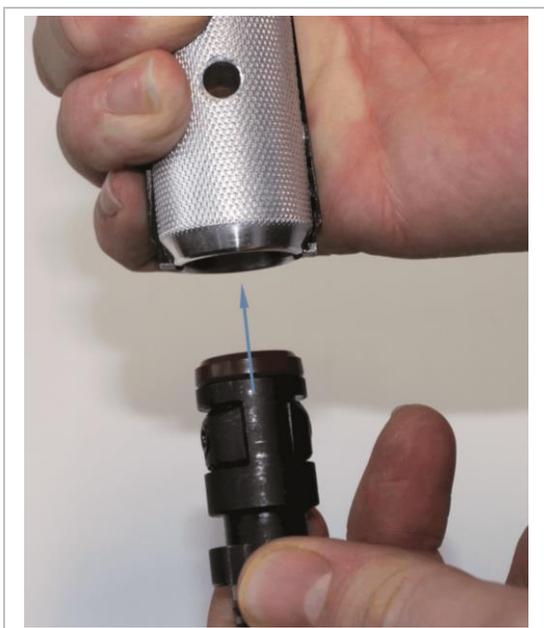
Inserting the KS clamping cartridge into the KS assembly pliers.
